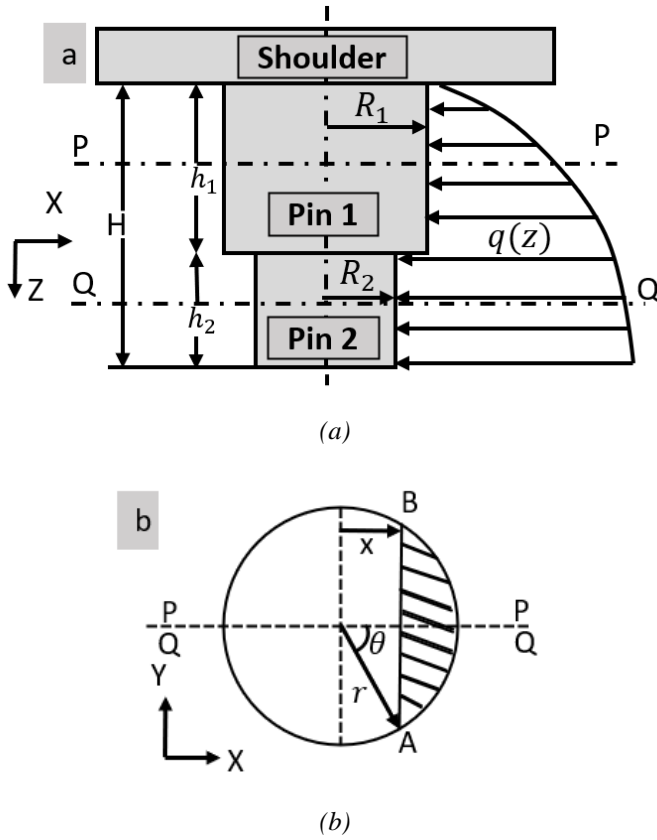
(a) Schematic of a friction stir welding tool (b) Cross-section at S-S.
